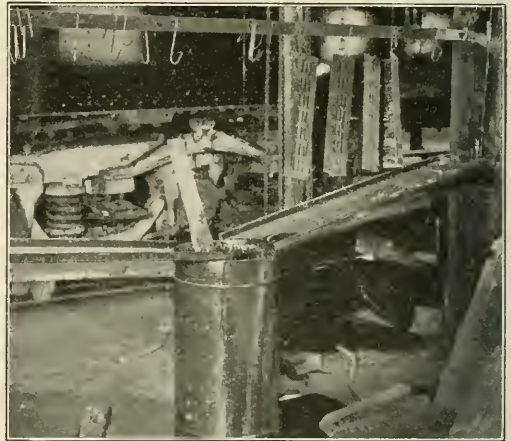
Arrangement for Dipping Small Parts and Car Fixtures
